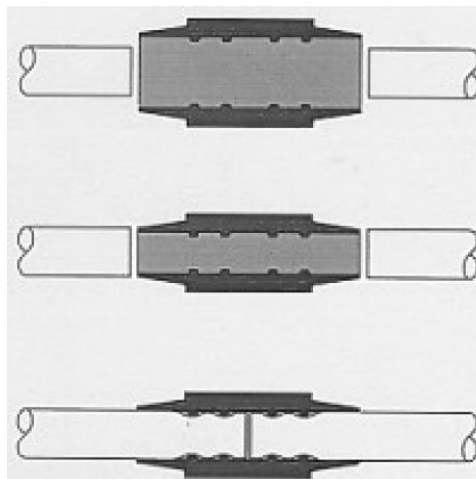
Coupling, machined and expanded(top), after free recovery(middle) and installed on a tube (bottom)
